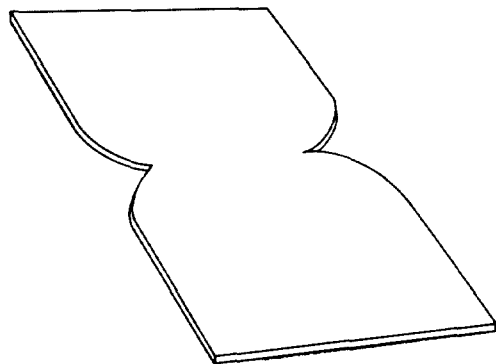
Dielectric sheet cut to fill air gap of nodal-clamped mounting
